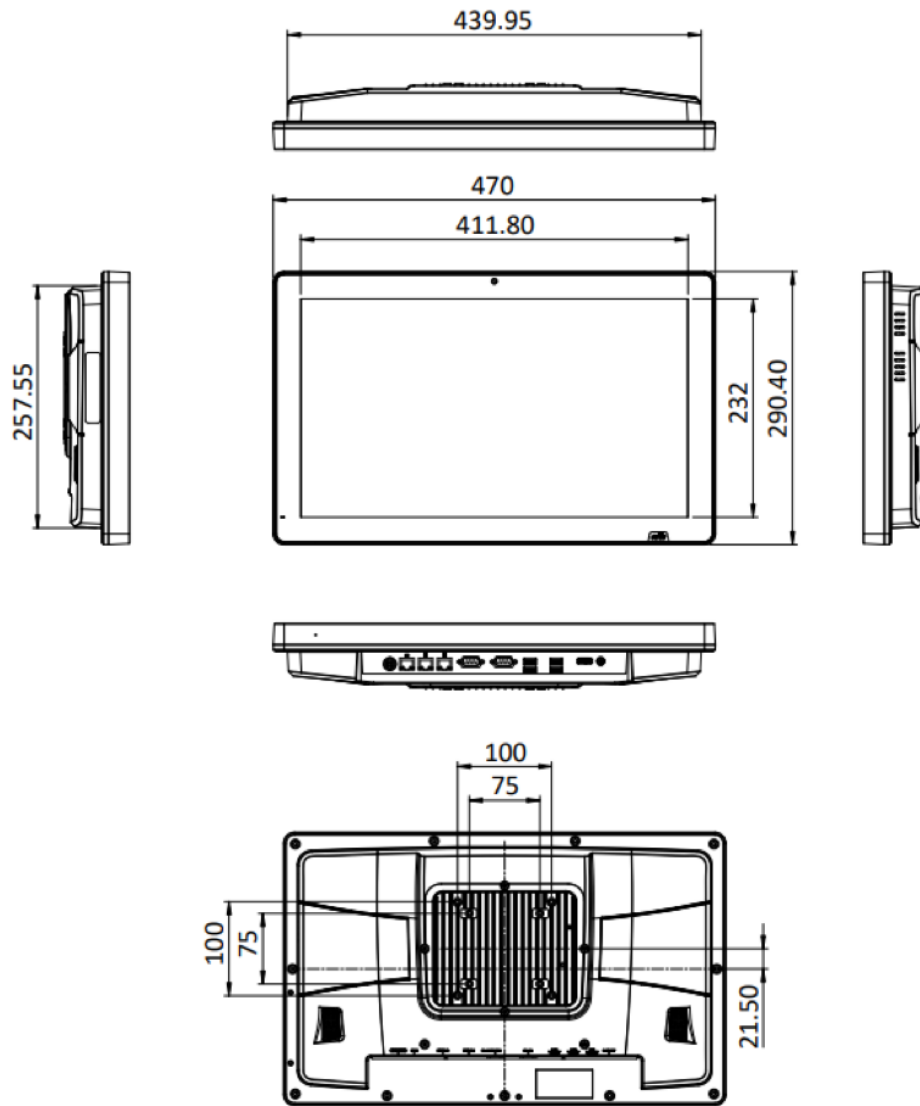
AFL3-W19C-ADLP Dimensions (mm)
